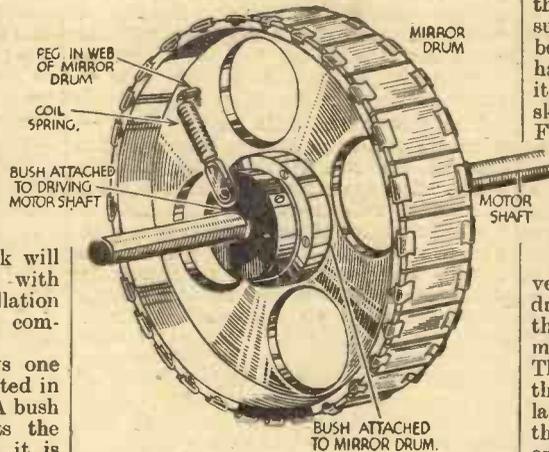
Showing one form of flexible coupling which may be used between the driving motor shaft and the mirror drum.
